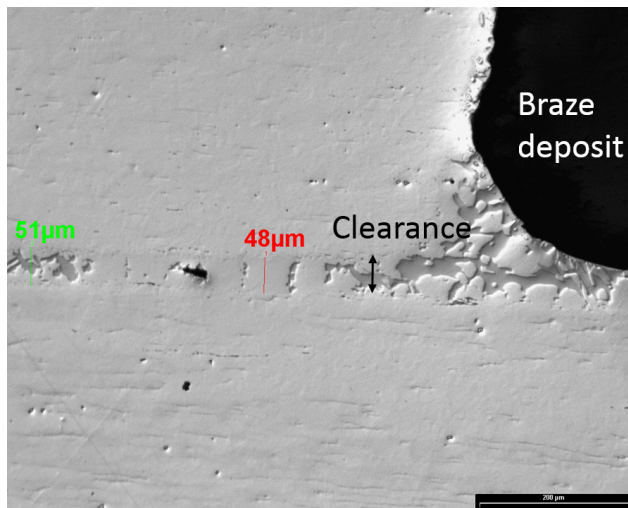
Grinding pattern of the brazed joint with the measurement of the clearance.
